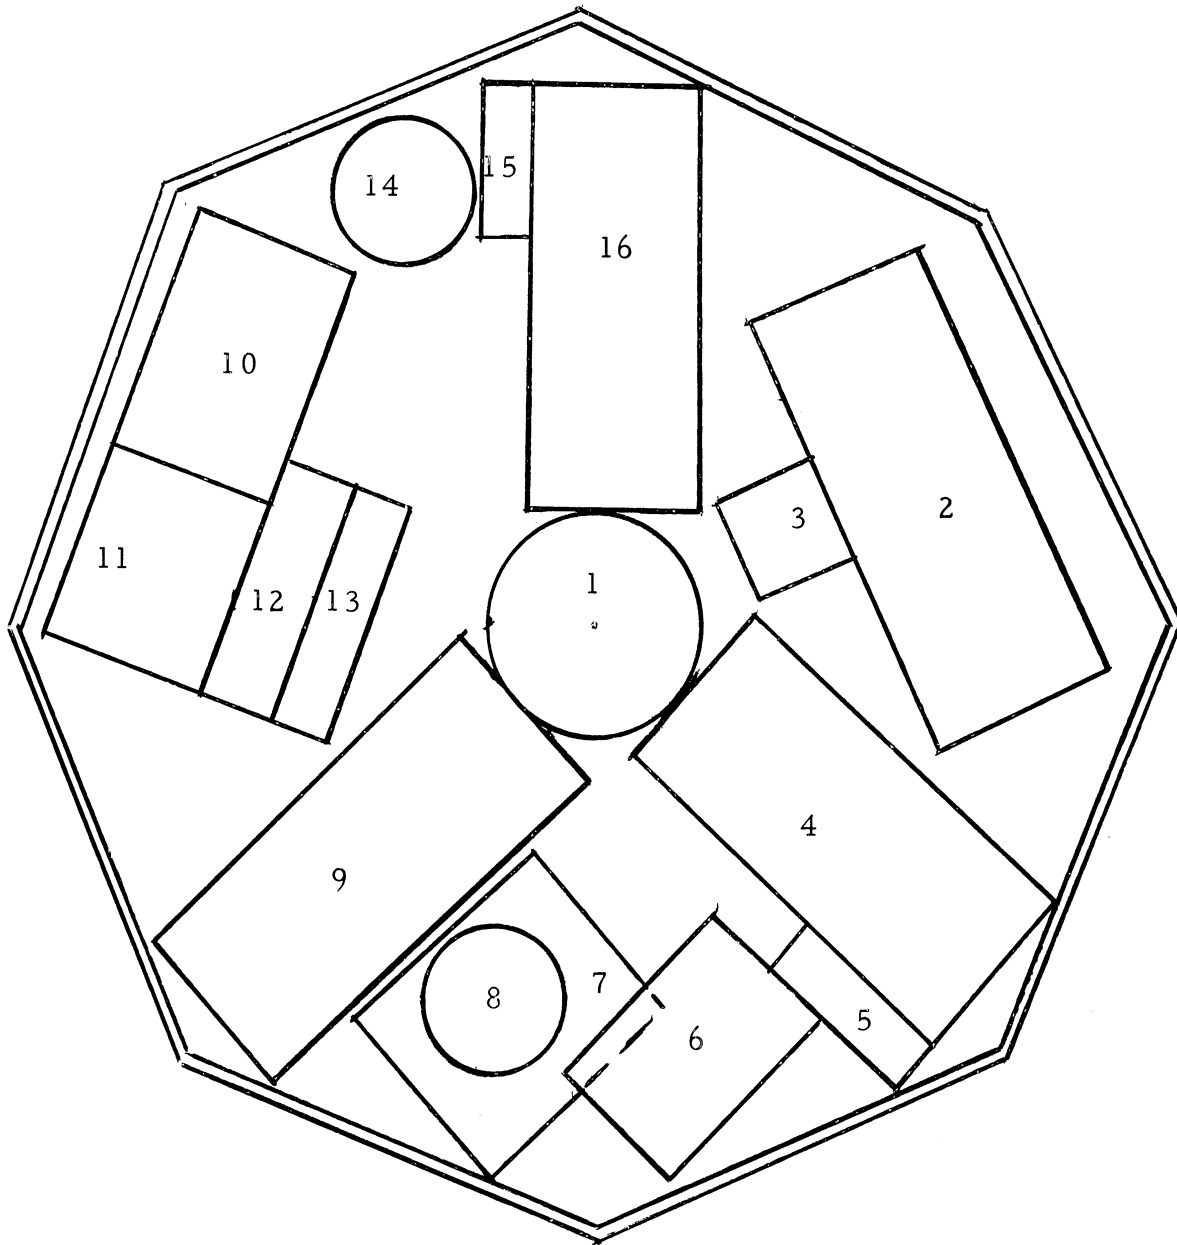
MOUNTING PLATFORM TOP SURFACE
